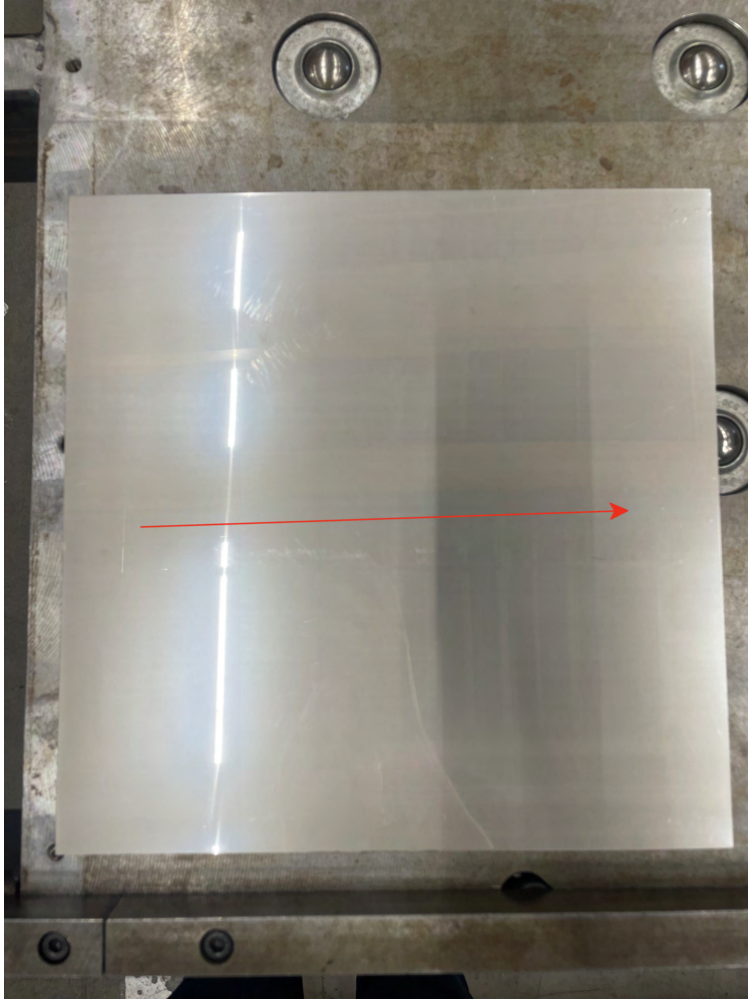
Stainless Steel 330 x 330mm Blank, Arrow Indicates Rolling Direction
